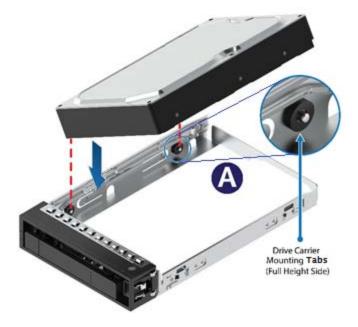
3.5" Drive Carrier Assembly – Drive Installation to Carrier
